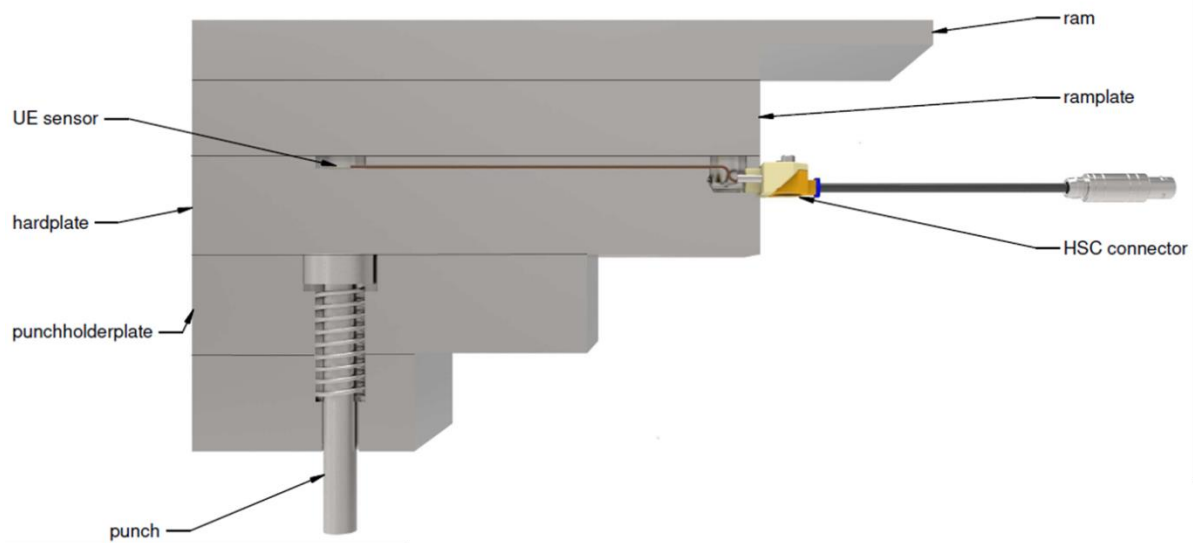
General sensor installation design to be applied on tool-modules for UC1.
